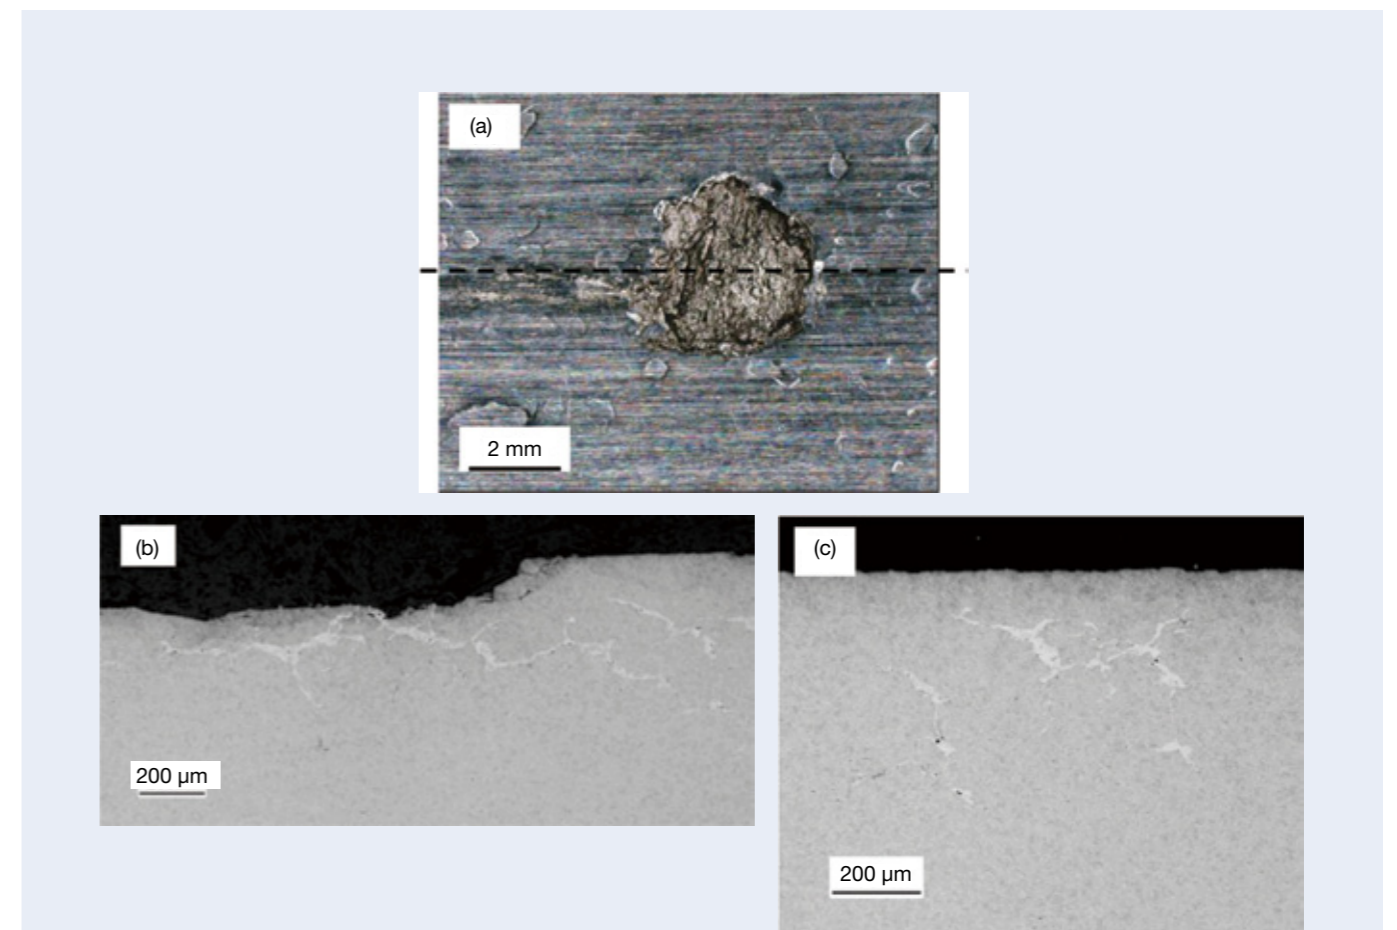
The raceway and the cross section of a failed bearing with white structure.
